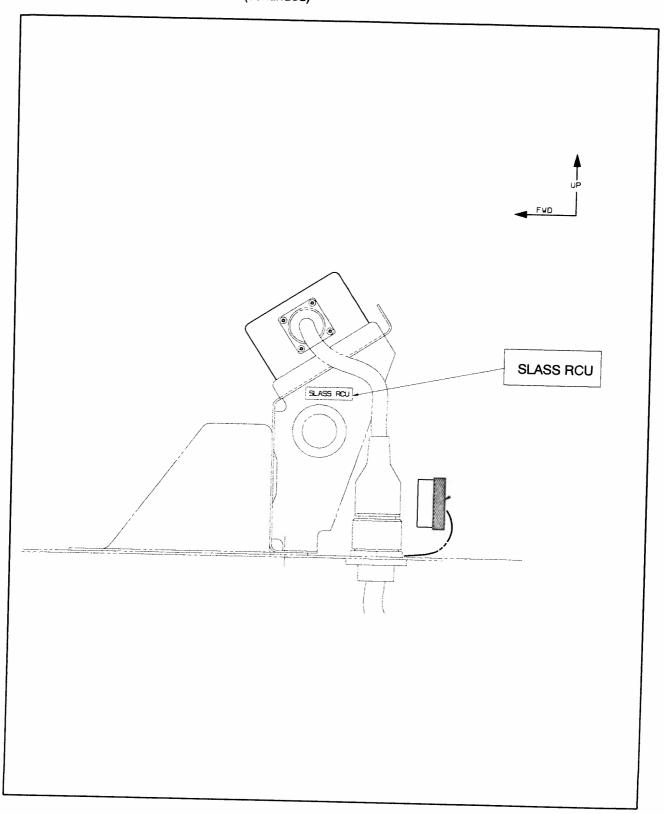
View showing label location on Hand Control Support Assembly for installation with SLASS
